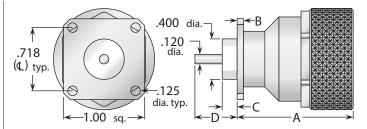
(1" square flange, interchangeable with type N standard flange size)
